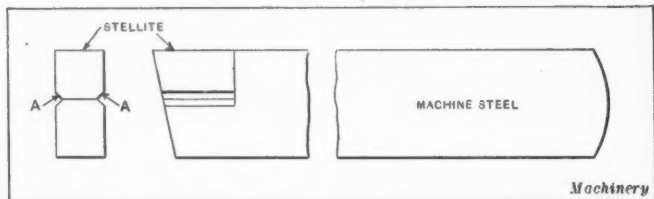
Stellite Bit and Machine Steel Tool Shank Ready for Welding
